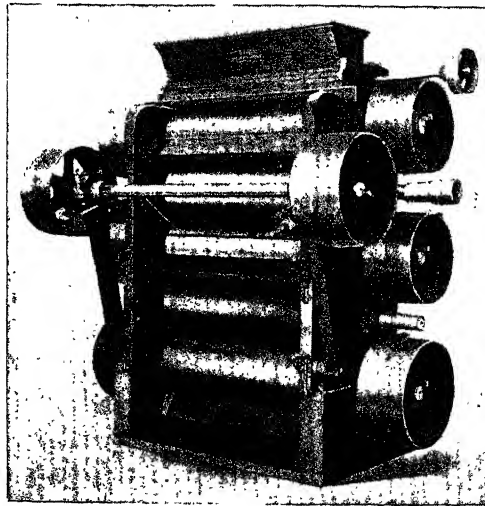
BUCKEYE CRUSHING ROLLS. SWING TAKE-UP, SINGLE BELT DRIVE.
